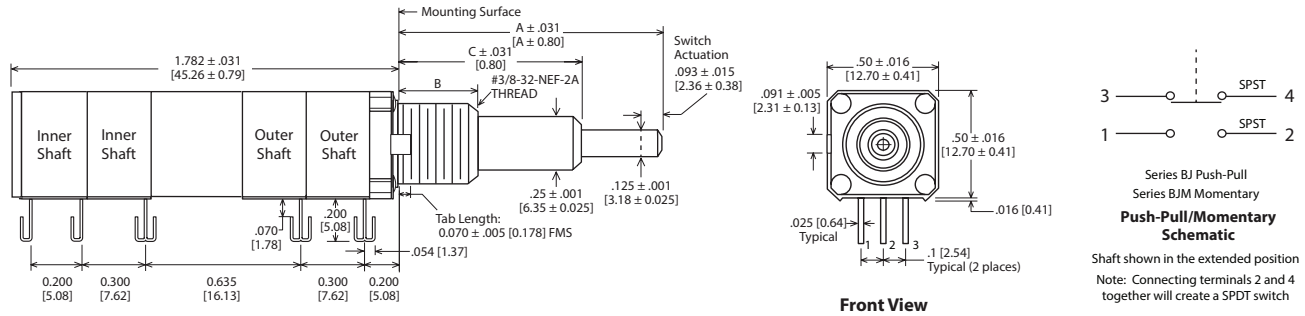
SHA13: Concentric Shafts, Solder Hook, 3 Potentiometer(s) or RS + MP, 3/8" Bushing
